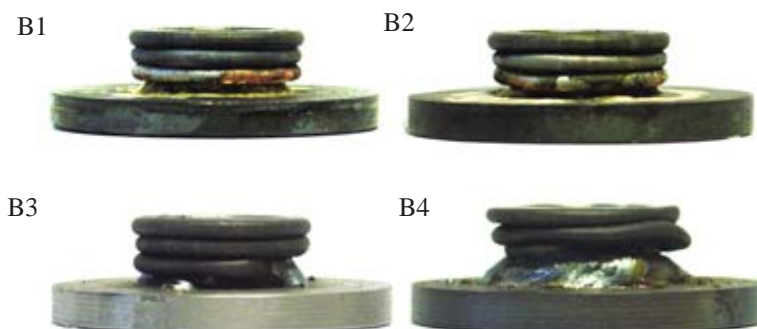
Compression of thin-walled tubes attached to two end plates by soldering using steel (a) and brass (b)
